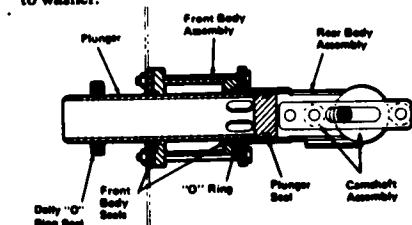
DIVERTER ASSEMBLY CROSS SECTION.
